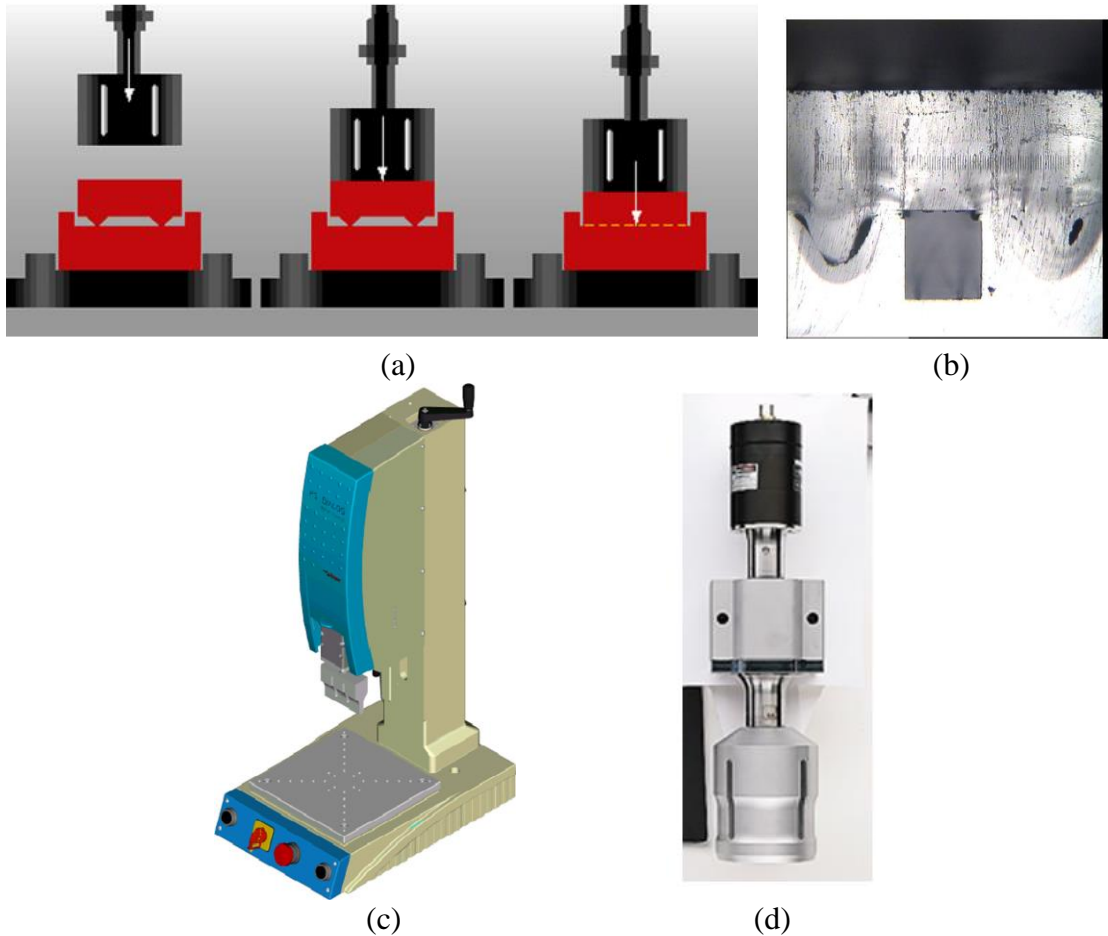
(a) Schematic of US welding process (b) Microscopic image of cross sectional view of the bonded microchannel (c) Standard US welding machine (courtesy of Hermann Ultraschalltechnik GmbH and Co., Germany) (d) Resonance stack comprising of piezo US convertor, booster and sonotrode [15]
